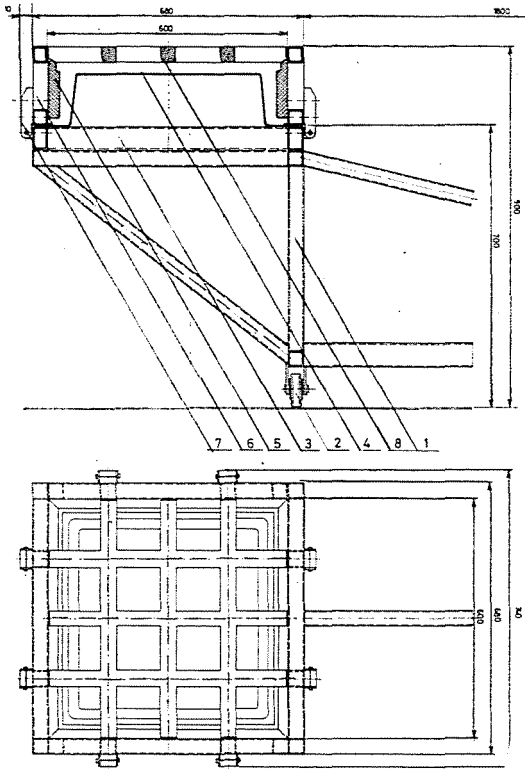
Twelve-unit carousel. Detail. Plan and vertical section through pouring board. 1 Bottom frame: cantilevered radial frame and vertical wing-frames; 2 wheel; 3 pouring board: basic frame; 4 pouring board: fibreglass poliester forming element fixed to the basic frame for forming the concave surface of the cell; 5 inlay element fixed to the tilting door for forming the perimeter surfaces of the cell; 6 tilting side-door; 7 hinge; 8 forming grid for producing the two-way channels on top of the cell element
